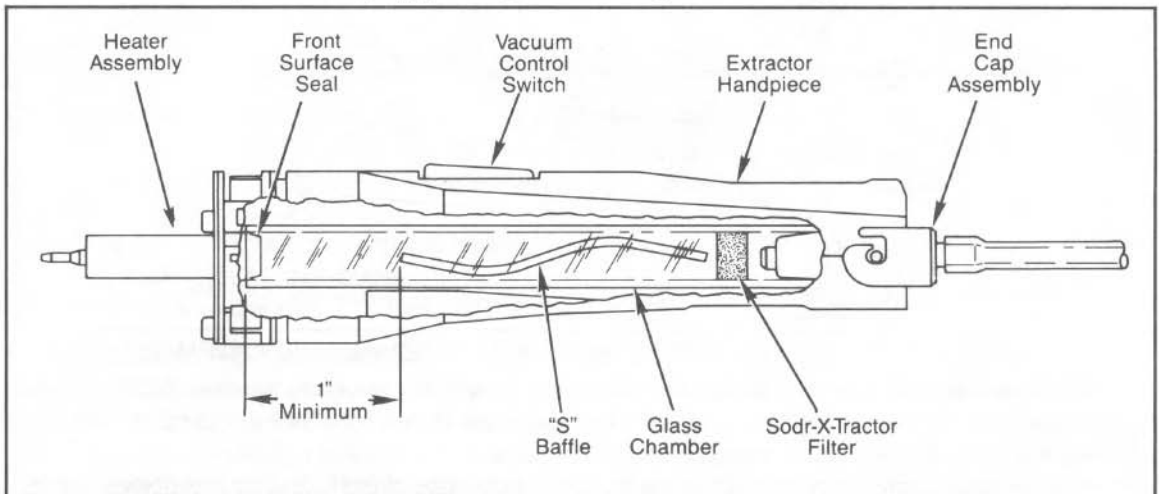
CUTAWAY OF EXTRACTOR HANDPIECE AND GLASS CHAMBER
